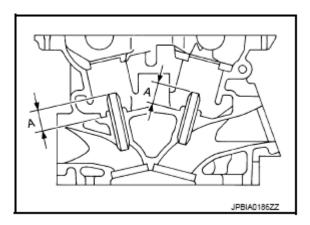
Valve Guide (EXH) From Camshaft Side Installed Dimension Courtesy of NISSAN NORTH AMERICA, INC.
